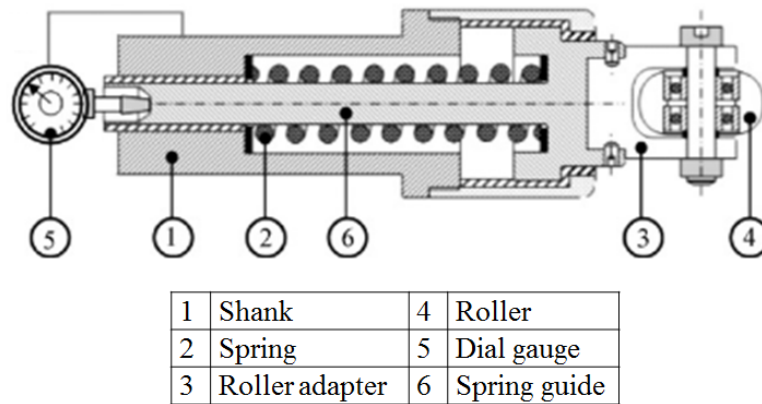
Detailed sectional view of roller burnishing tool assembly (El-Tayeb et al. 2007).
